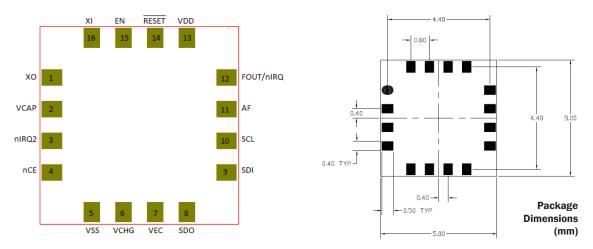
CBC34813 Package (left: top view, looking through package; right: pad dimensions)
